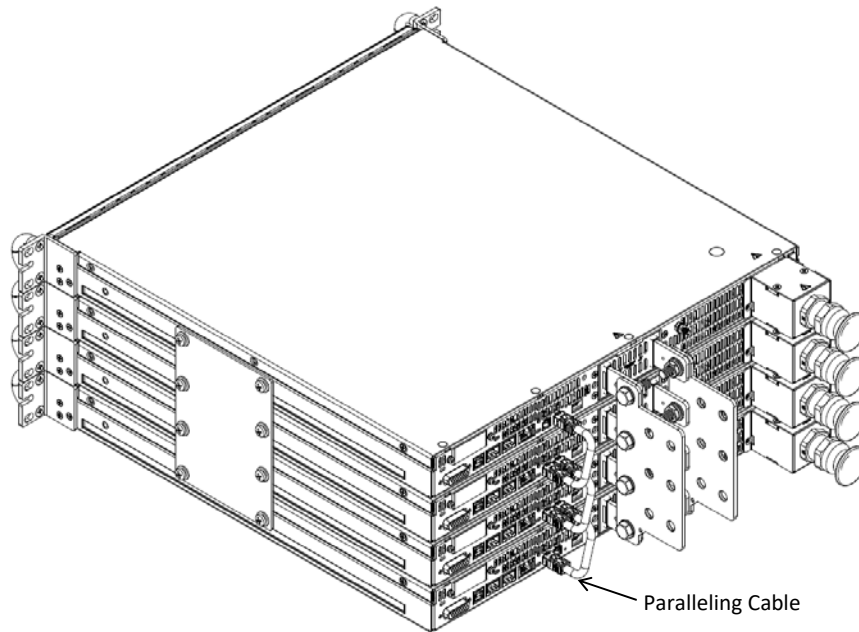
Four 60V±100V Units Connection Plates 4U Assembly
